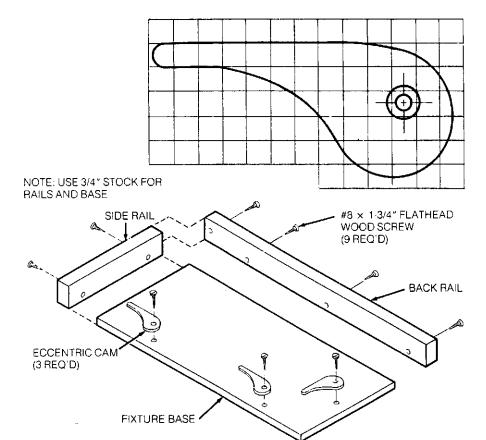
Using eccentric cams to hold a workpiece in a fixture.
